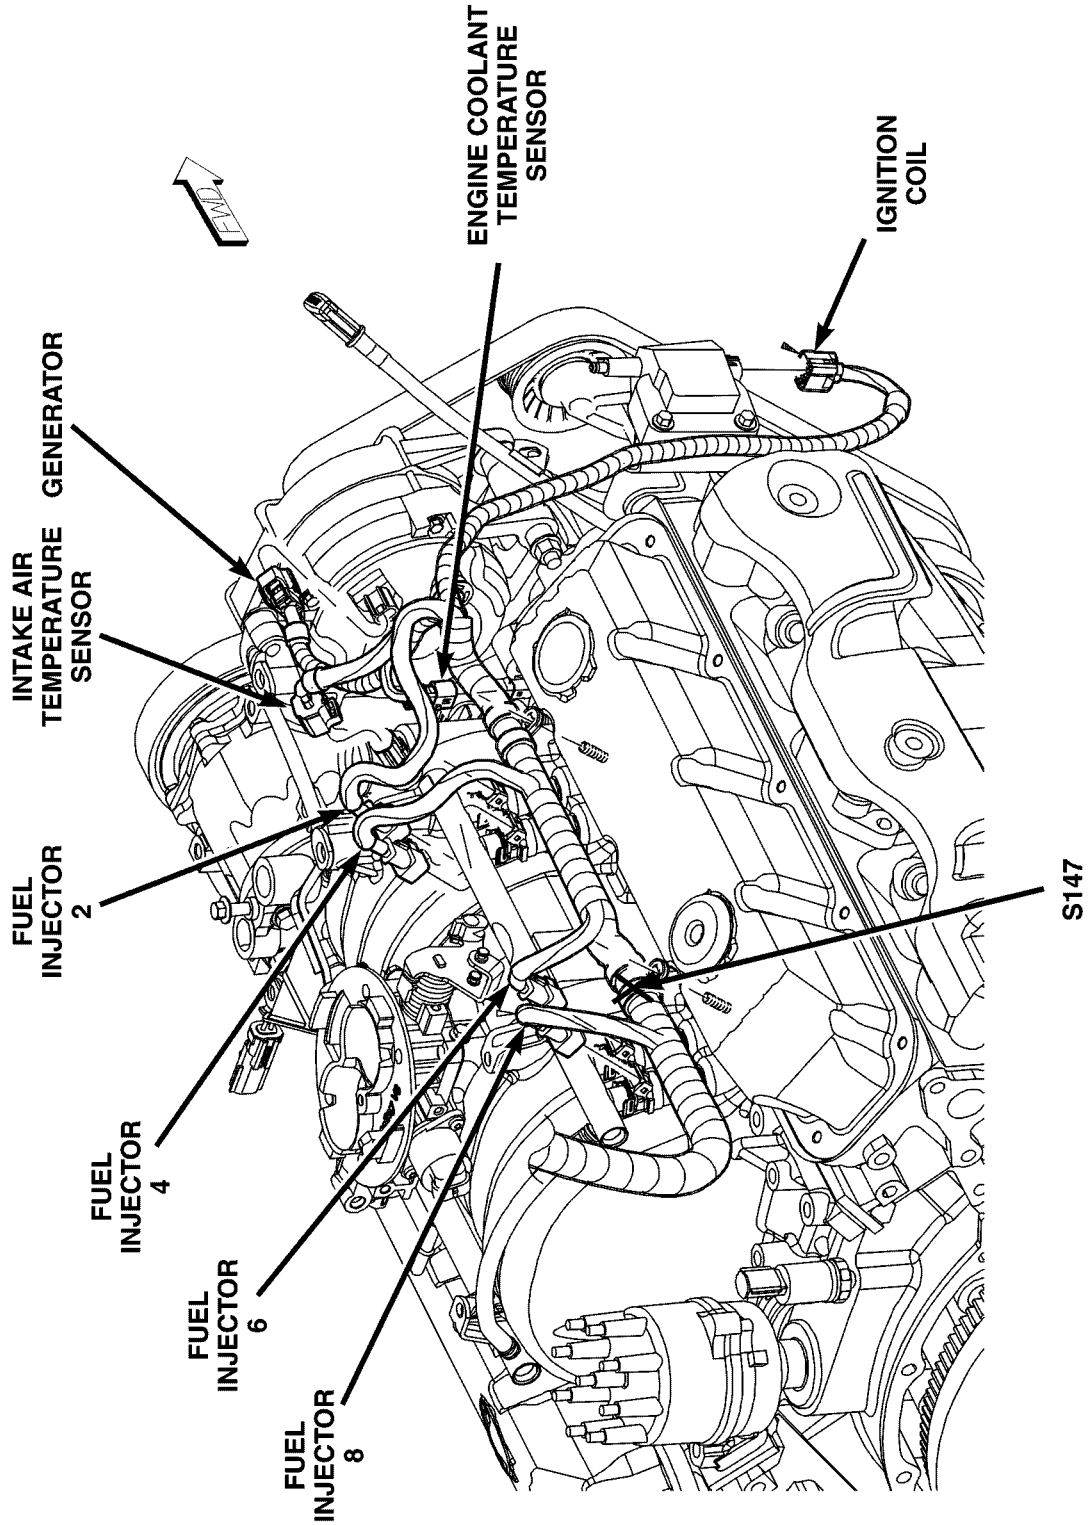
RIGHT SIDE ENGINE, 5.9L
